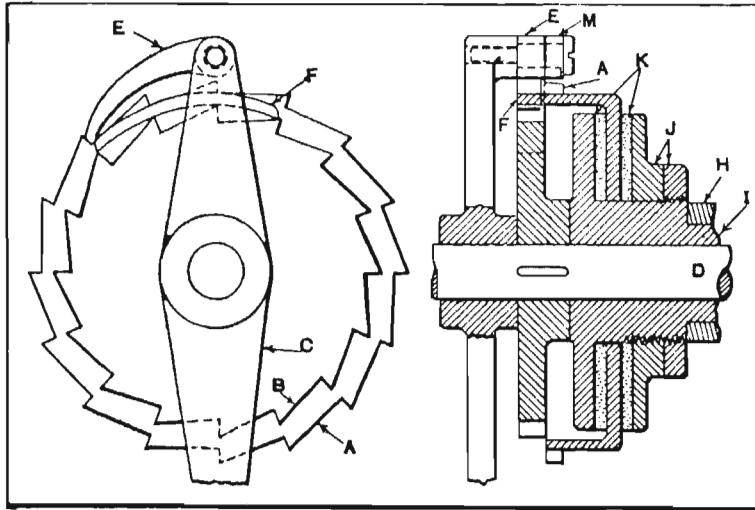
Double Ratchet Having Shield which Prevents One Pawl from Engaging Wheel During Dwell
